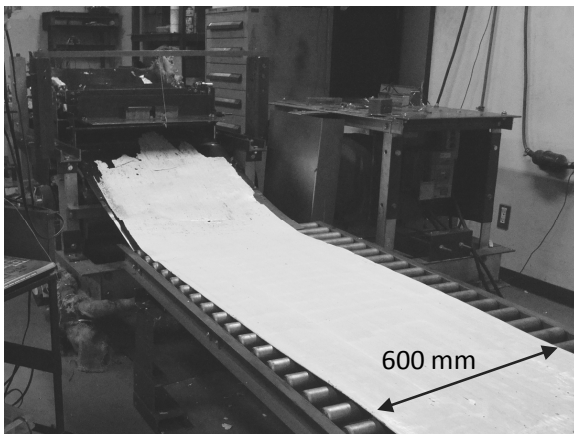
Casting of 600 mm width AA5182 strip by a single roll caster equipped with a scraper
